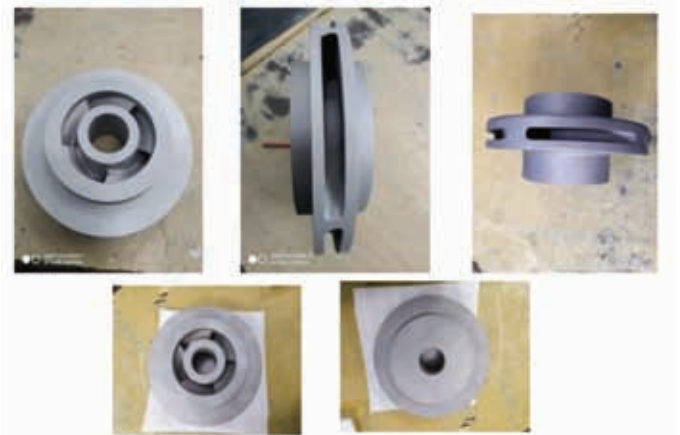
Several sizes impellers 3D printed (titanium and stainless steel alloys used).
